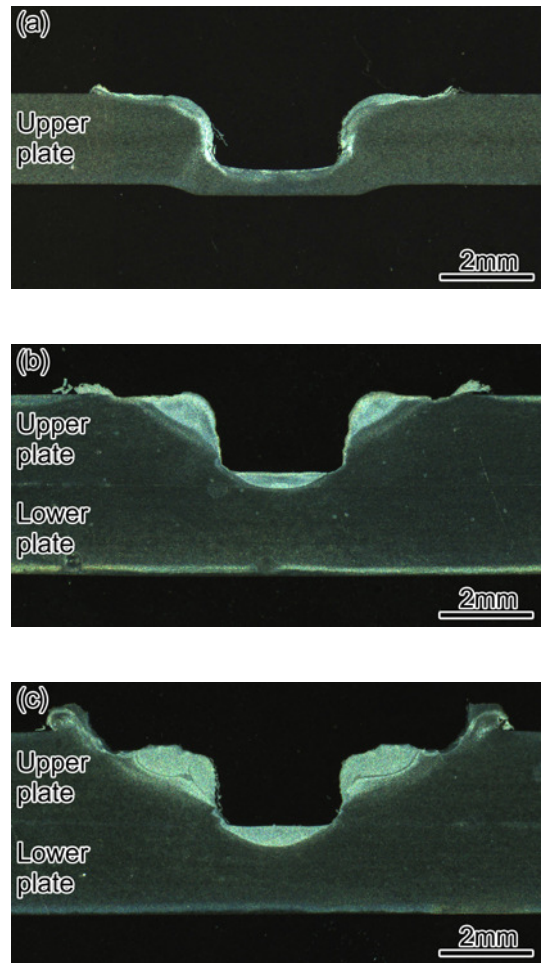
Stereomicroscope images of joints welded at tool plunge depth of (a) 1.5 mm, (b) 1.7 mm, and (c) 1.9 mm.
